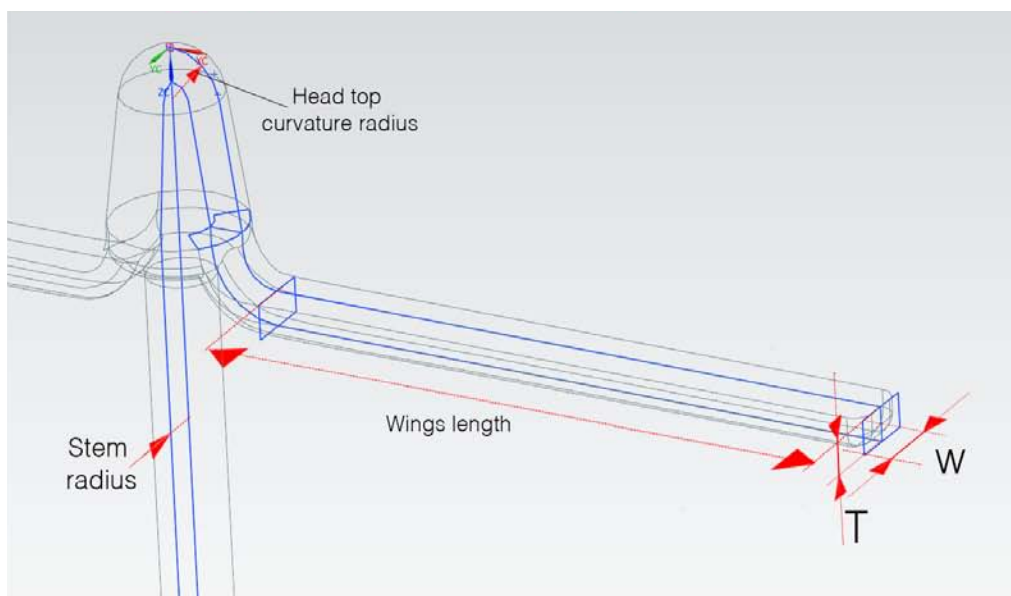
Principal dimensions involved to the 3D CAD of the clips.
